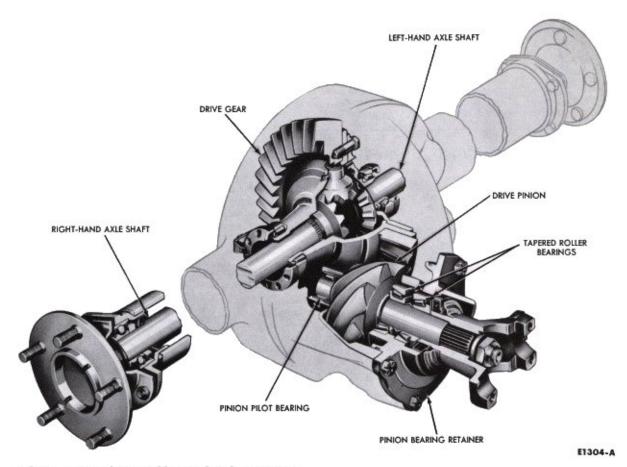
Rear Axle Assembly—Used With V-8 Engine
